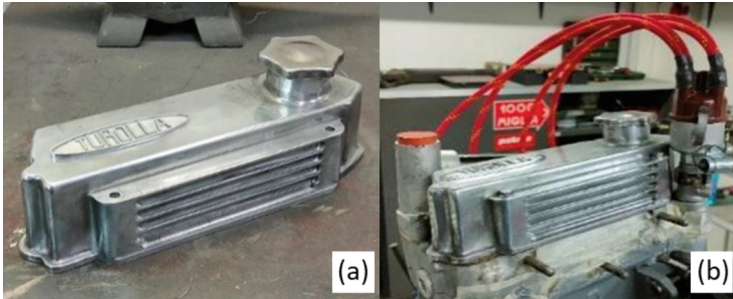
The final valve cover (a) and its assembly on the engine head (b).
